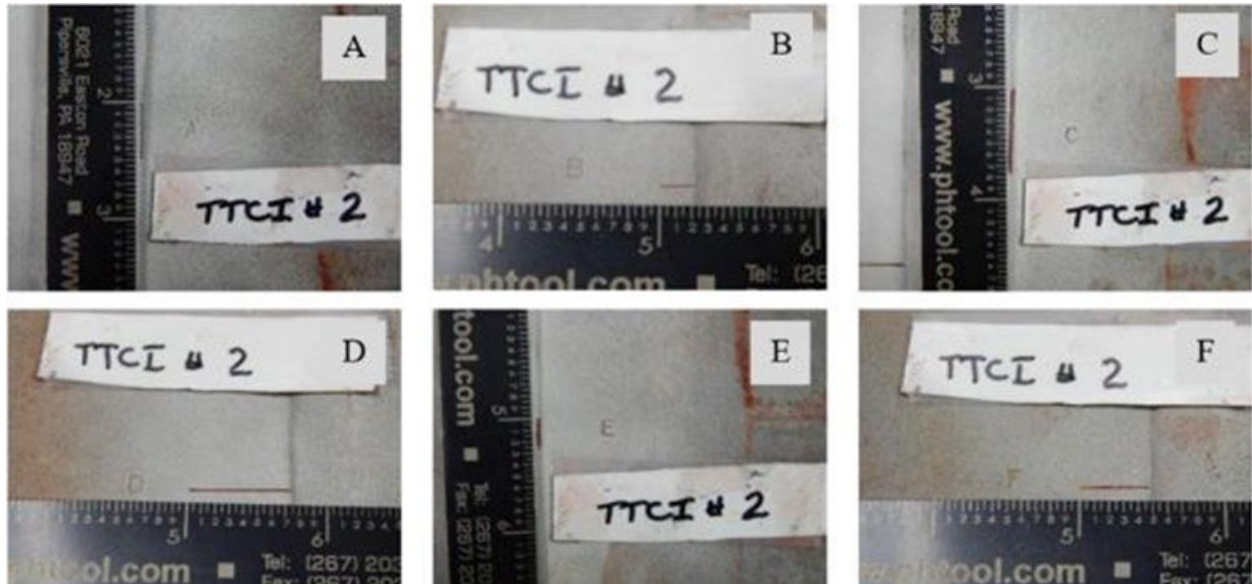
TPCI-2 EDM notch butt weld mg panel
